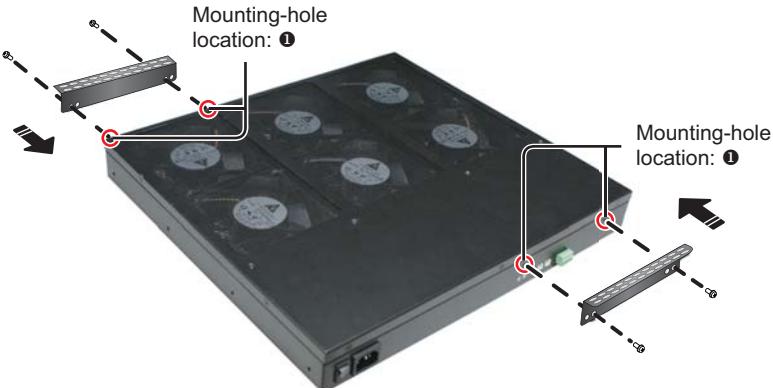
a) ADU's Mounting-hole Locations (Front and Back)
